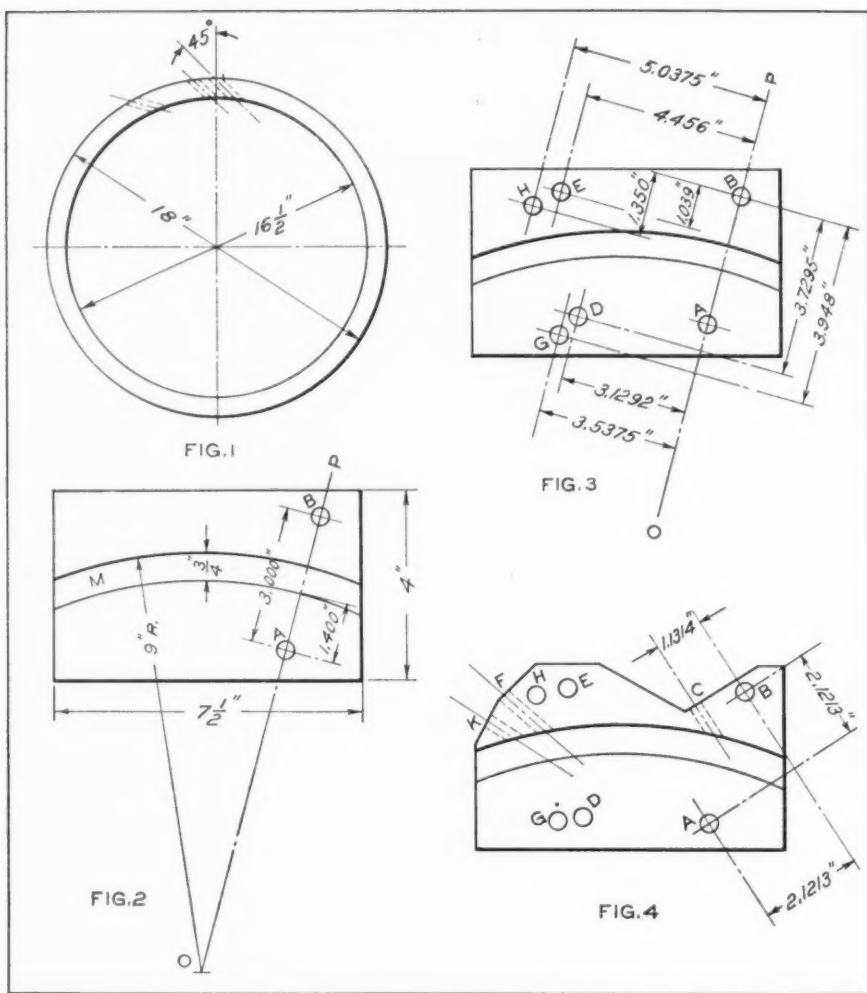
Ring in which Ninety-six Evenly Spaced Holes are to be Drilled
